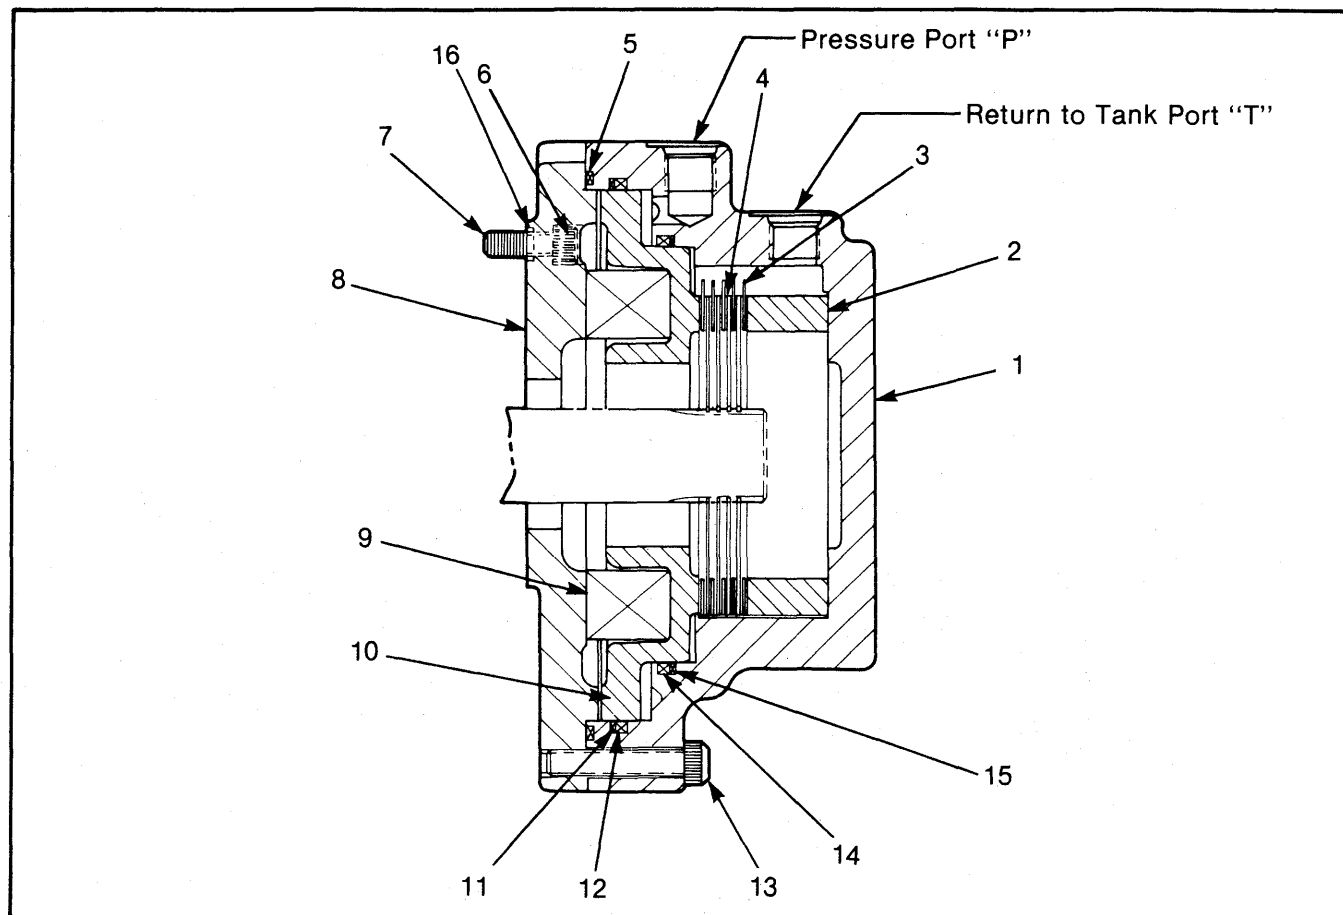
SECTIONAL VIEW, ROL-SEAL® BRAKE
